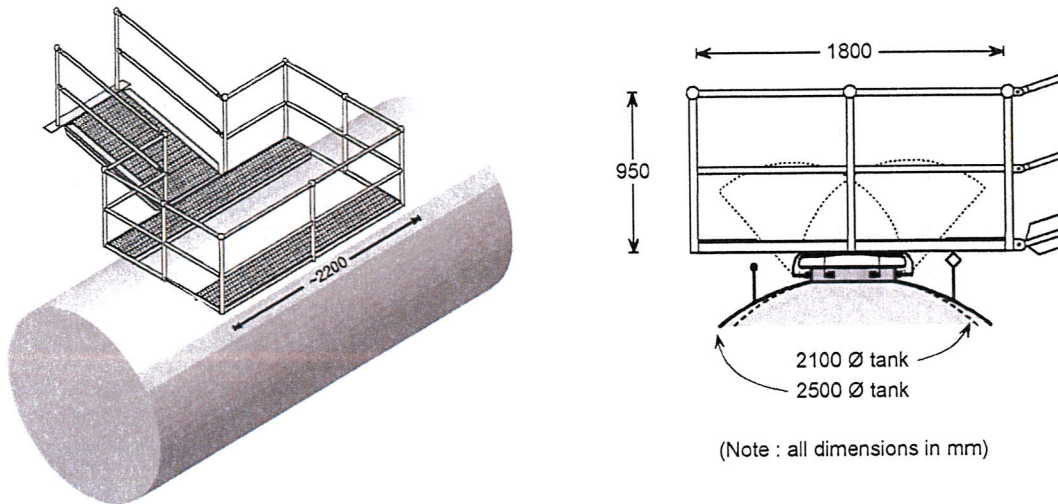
Perspective and end views of a safety cage fitted with floor sections
